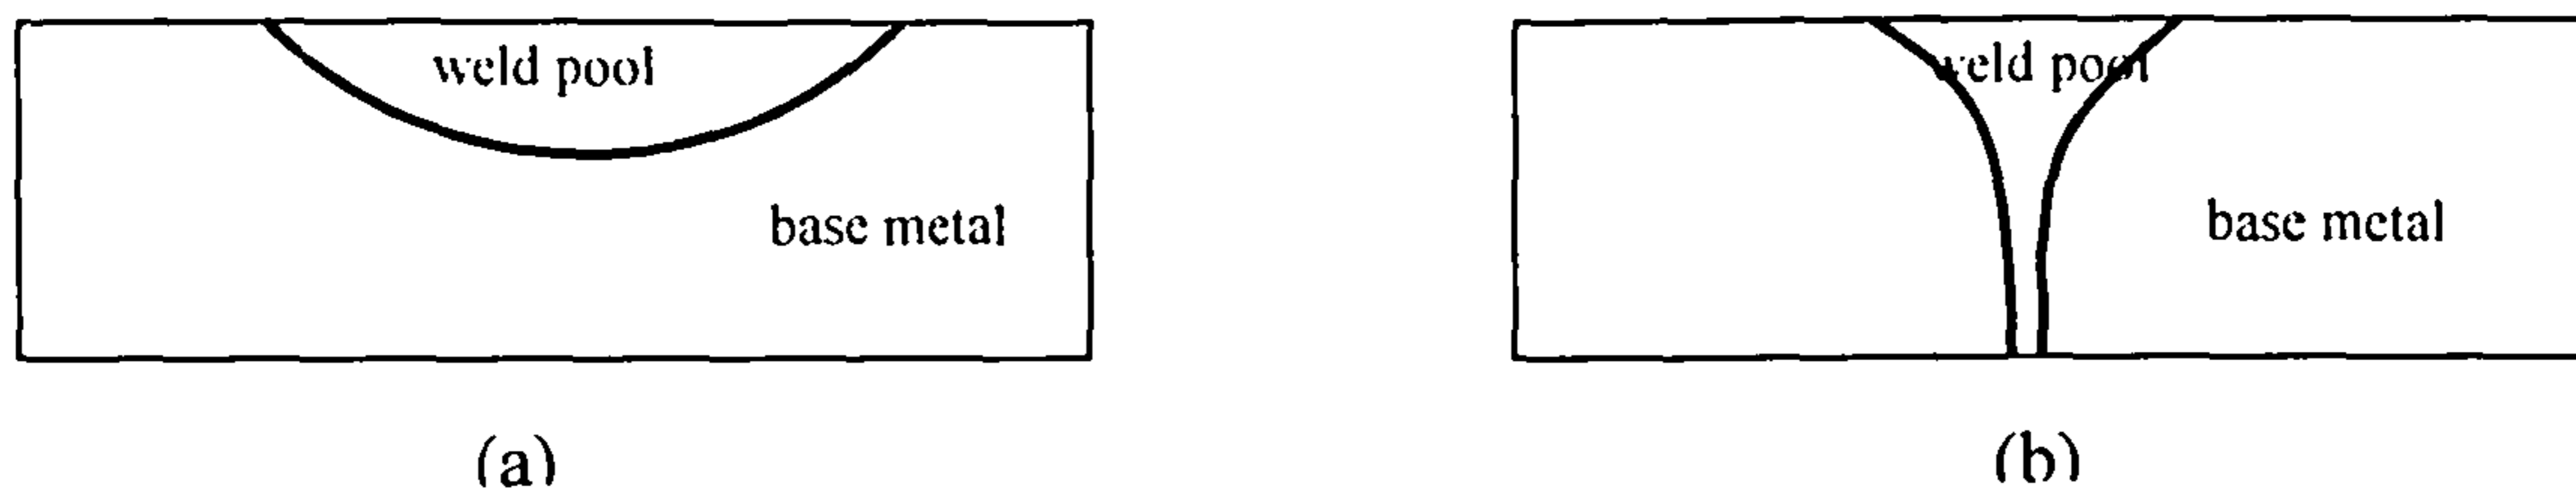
Schematic showing (a) shape of a conduction weld and (b) shape of a keyhole weld
